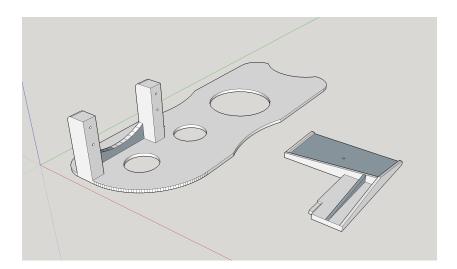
CAD design of the card feeder. Servo motor attaches to the bigger plate on the left and card holder on the right attaches to the arm of the servo motor. Card holder is designed to fit standard sized payment card.
